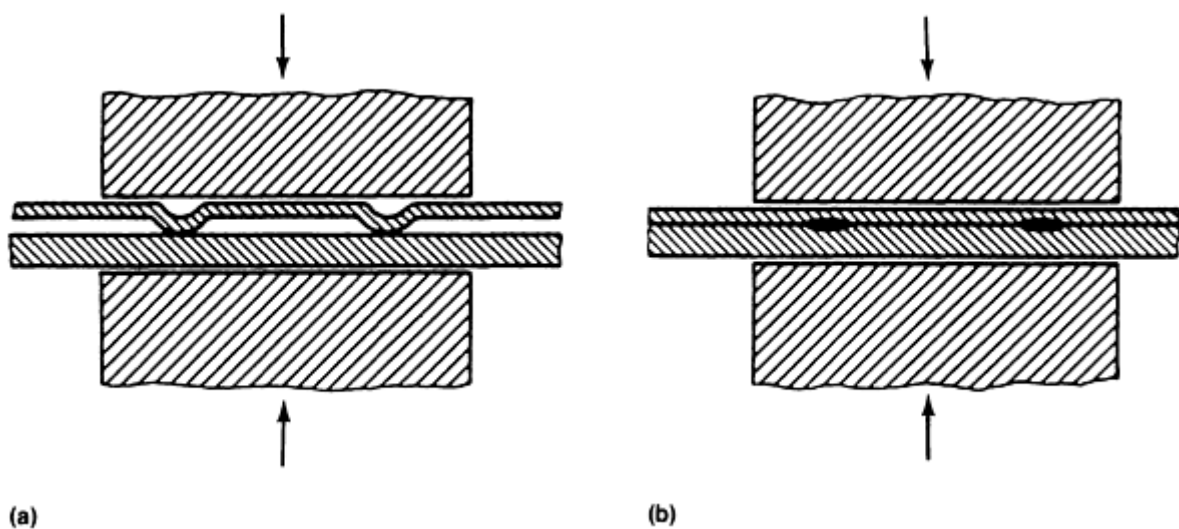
RELATION OF WELD NUGGETS TO EMBOSSED REGIONS OF METAL SHEETS USED IN PROJECTION WELDING. (A) ELECTRICAL CIRCUIT LOOP IS COMPLETED WHEN CURRENT TRAVELS THROUGH EMBOSSED PROJECTION CONTACT POINTS. (B) ADDITION OF PRESSURE AFTER WELDING CURRENT IS TURNED OFF CAUSES PLASTIC DEFORMATION WHICH FLATTENS THE PROJECTIONS.
